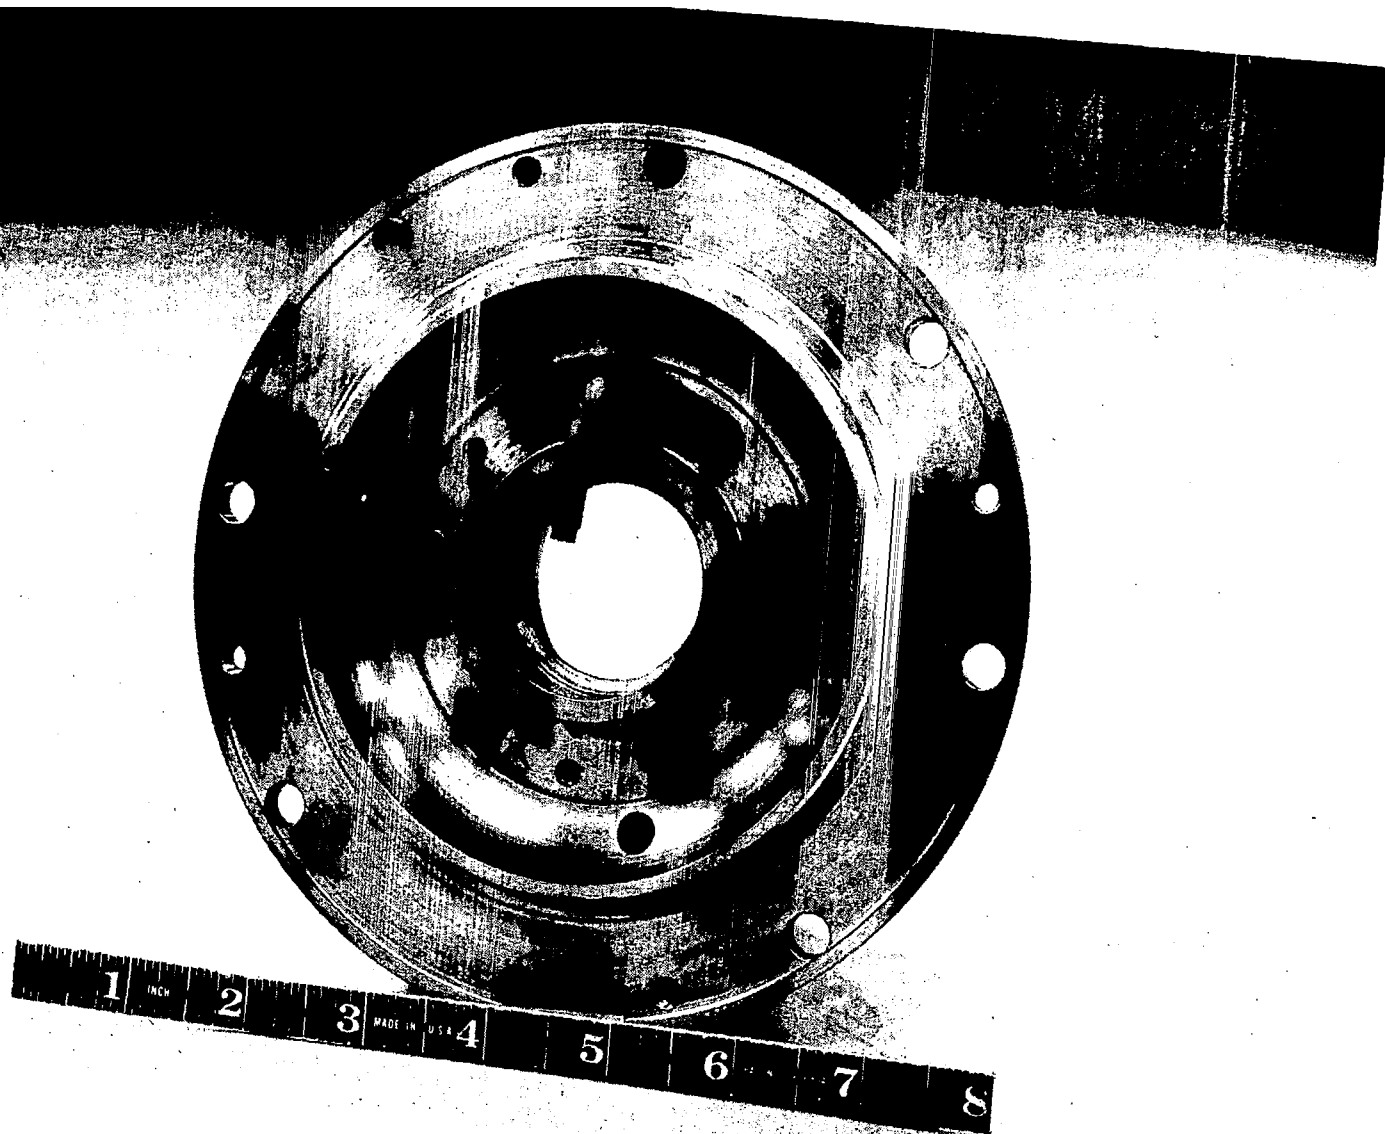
Intermediate Housing - Seal Test Rig X-22343
